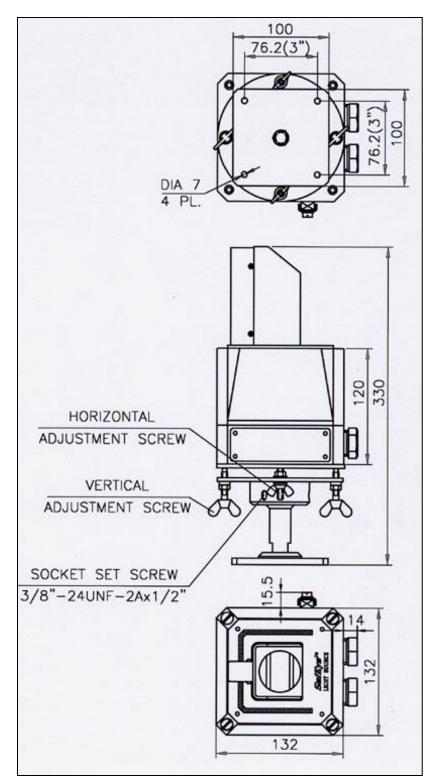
Source Outline Drawing (Reflector Type) with Swivel Mount
